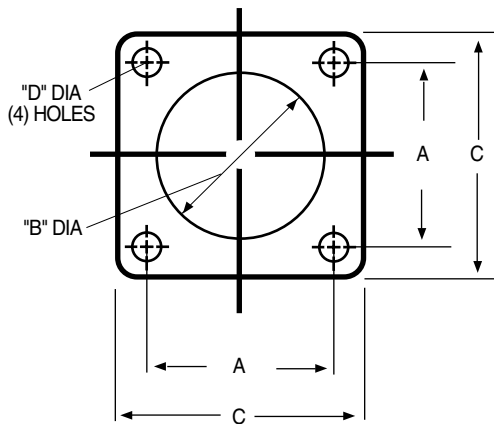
shows an outline drawing of the typical connector gasket. The tabular dimensions for each of the standard connector gasket sizes are in Table 4.
